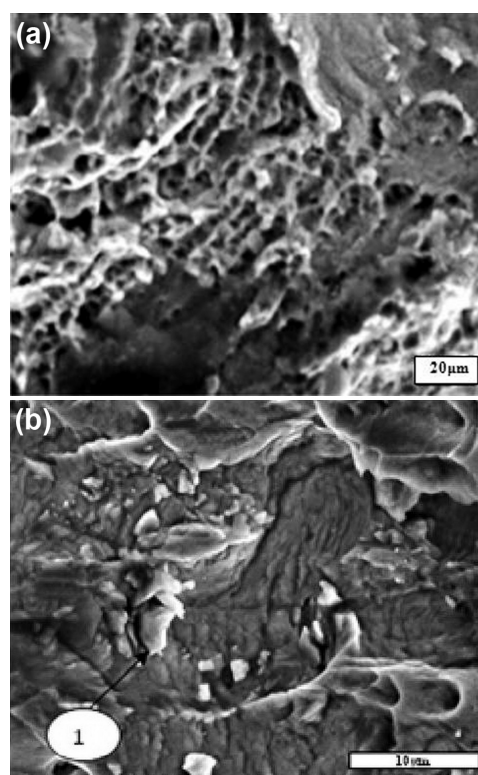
a) The appearance of a fracture surface of the Nimonic 263 superalloy after heat treatment R1, b) detail from Figure 4a – unfavourable Ti carbide
